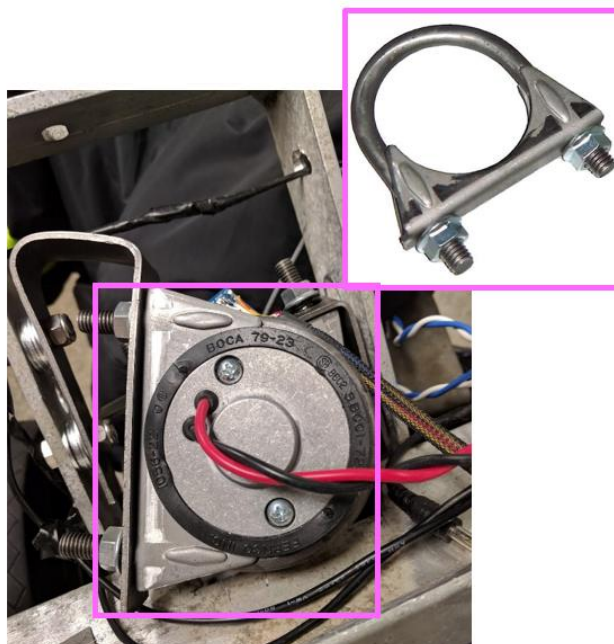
Exhaust clamp holding the CIM motor through the Fernco Coupling. [25]
